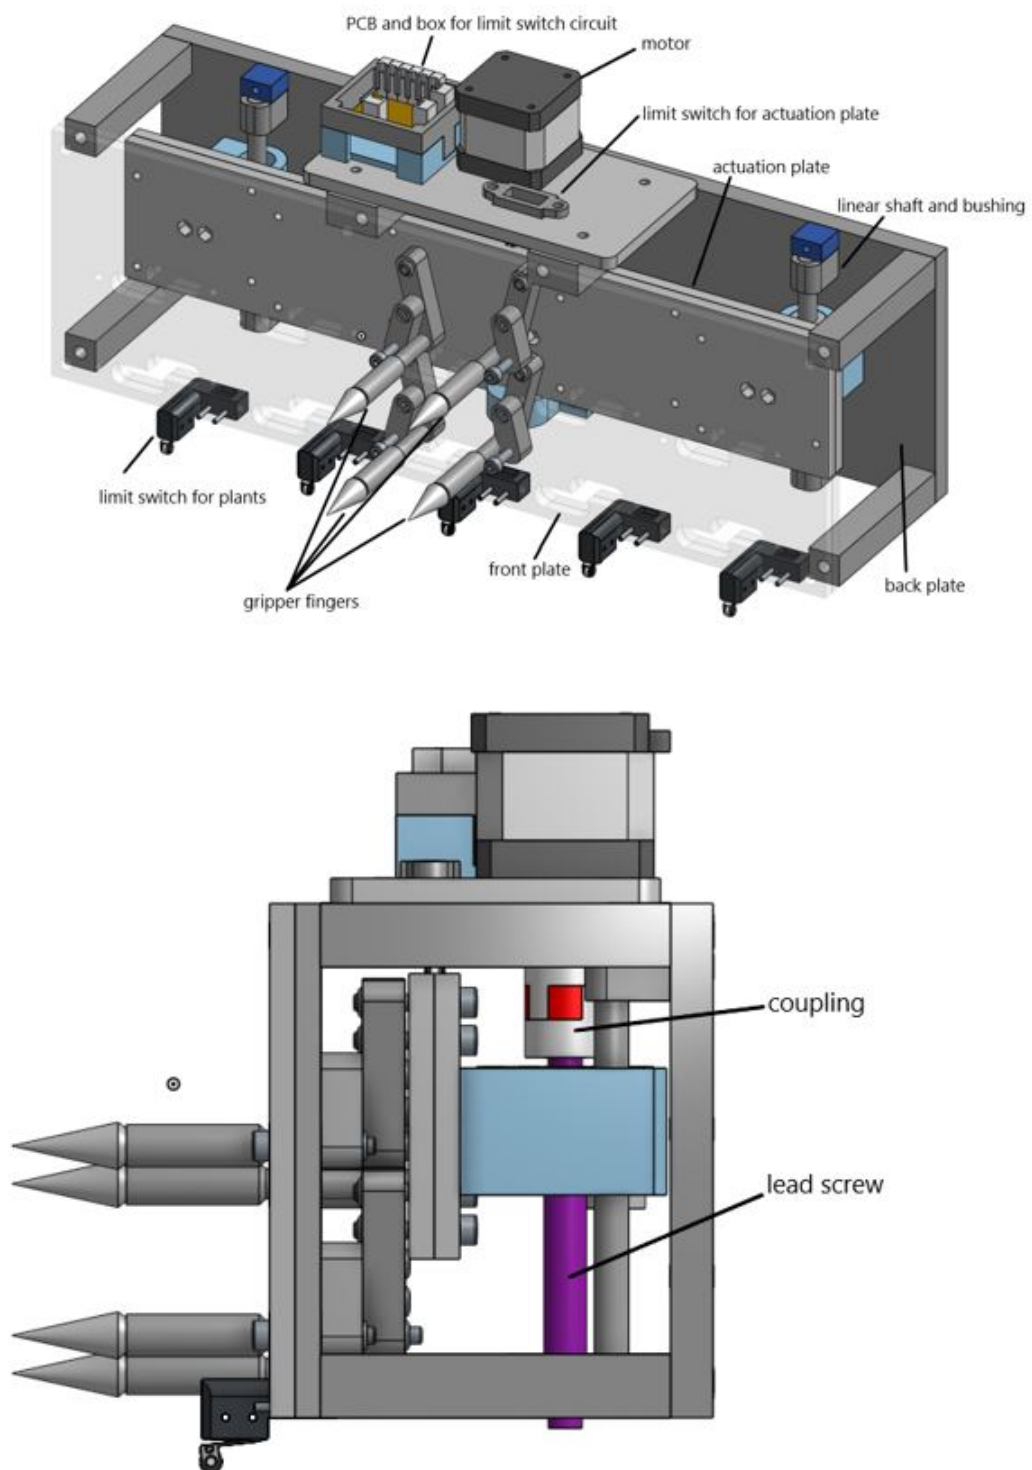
The finished CAD model of the multi-gripper, only one single gripper out of the five is depicted
